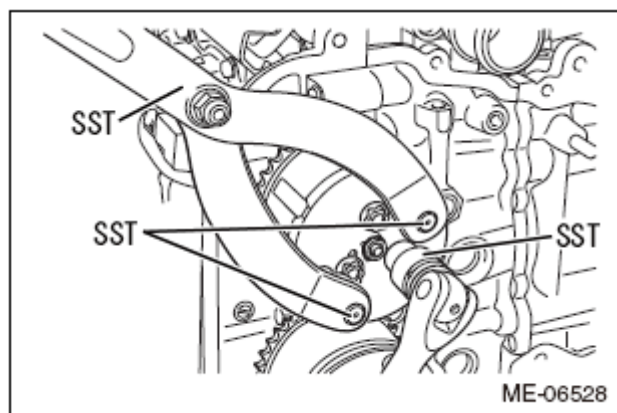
Removing Camshaft Timing Intake Gear Assembly RH
